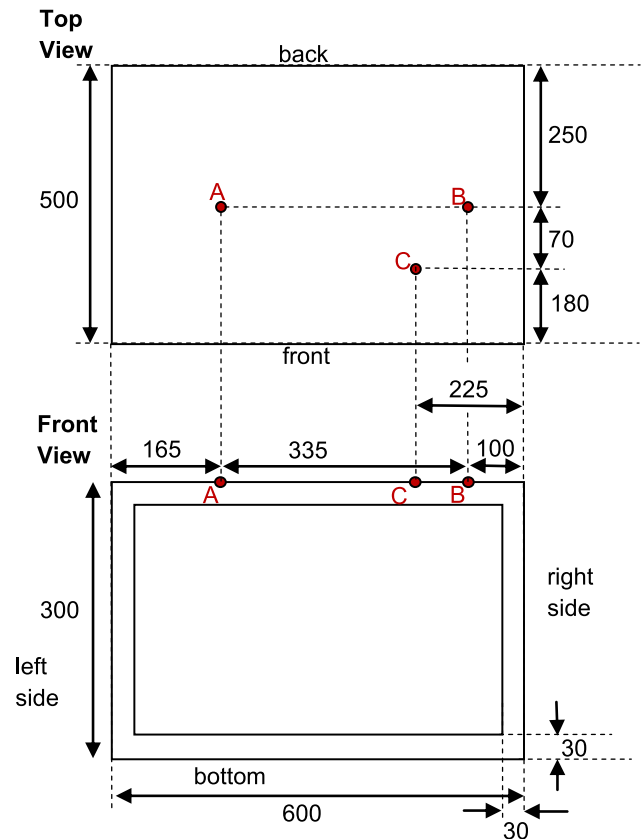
Physical dimensions (in millimeters) of the test-object enclosure.
